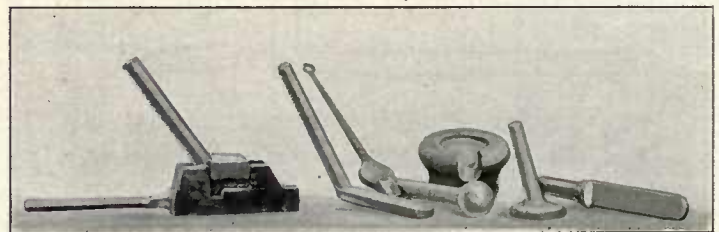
Formers for Forging Smokebox Braces Under a Steam Hammer.
